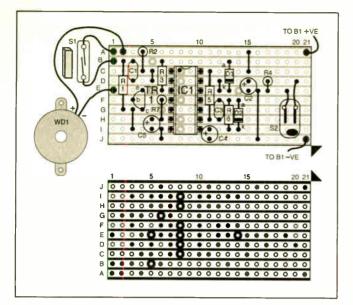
Stripboard component layout, off-board wiring and details of breaks required in the underside copper strips. The transistor pinouts are shown inset right.
